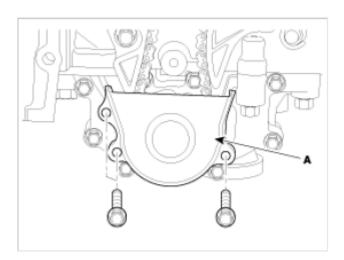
Identifying Oil Pump Chain Cover With Mounting Bolts
